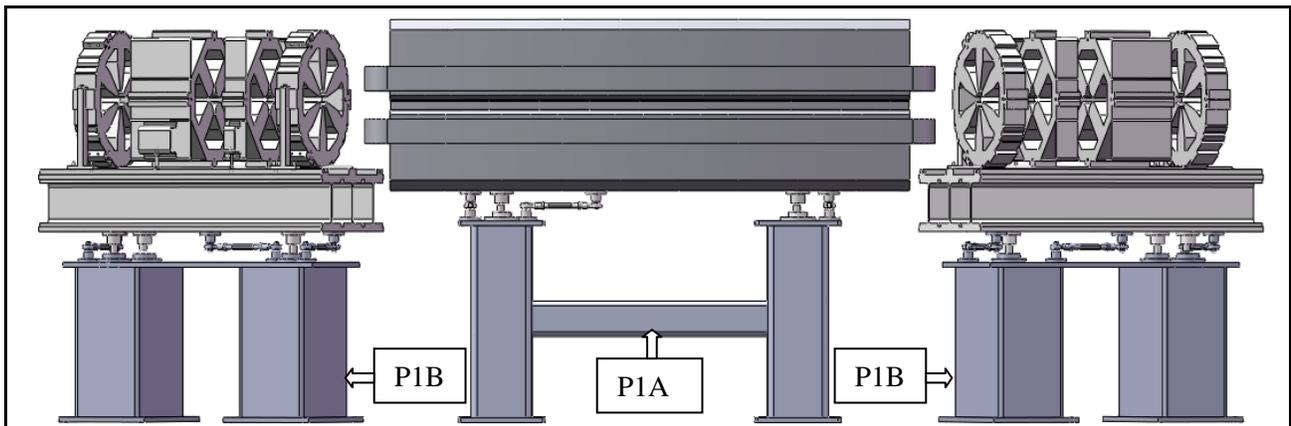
First Proposal of SESAME Girder System(P1 types A & B).
